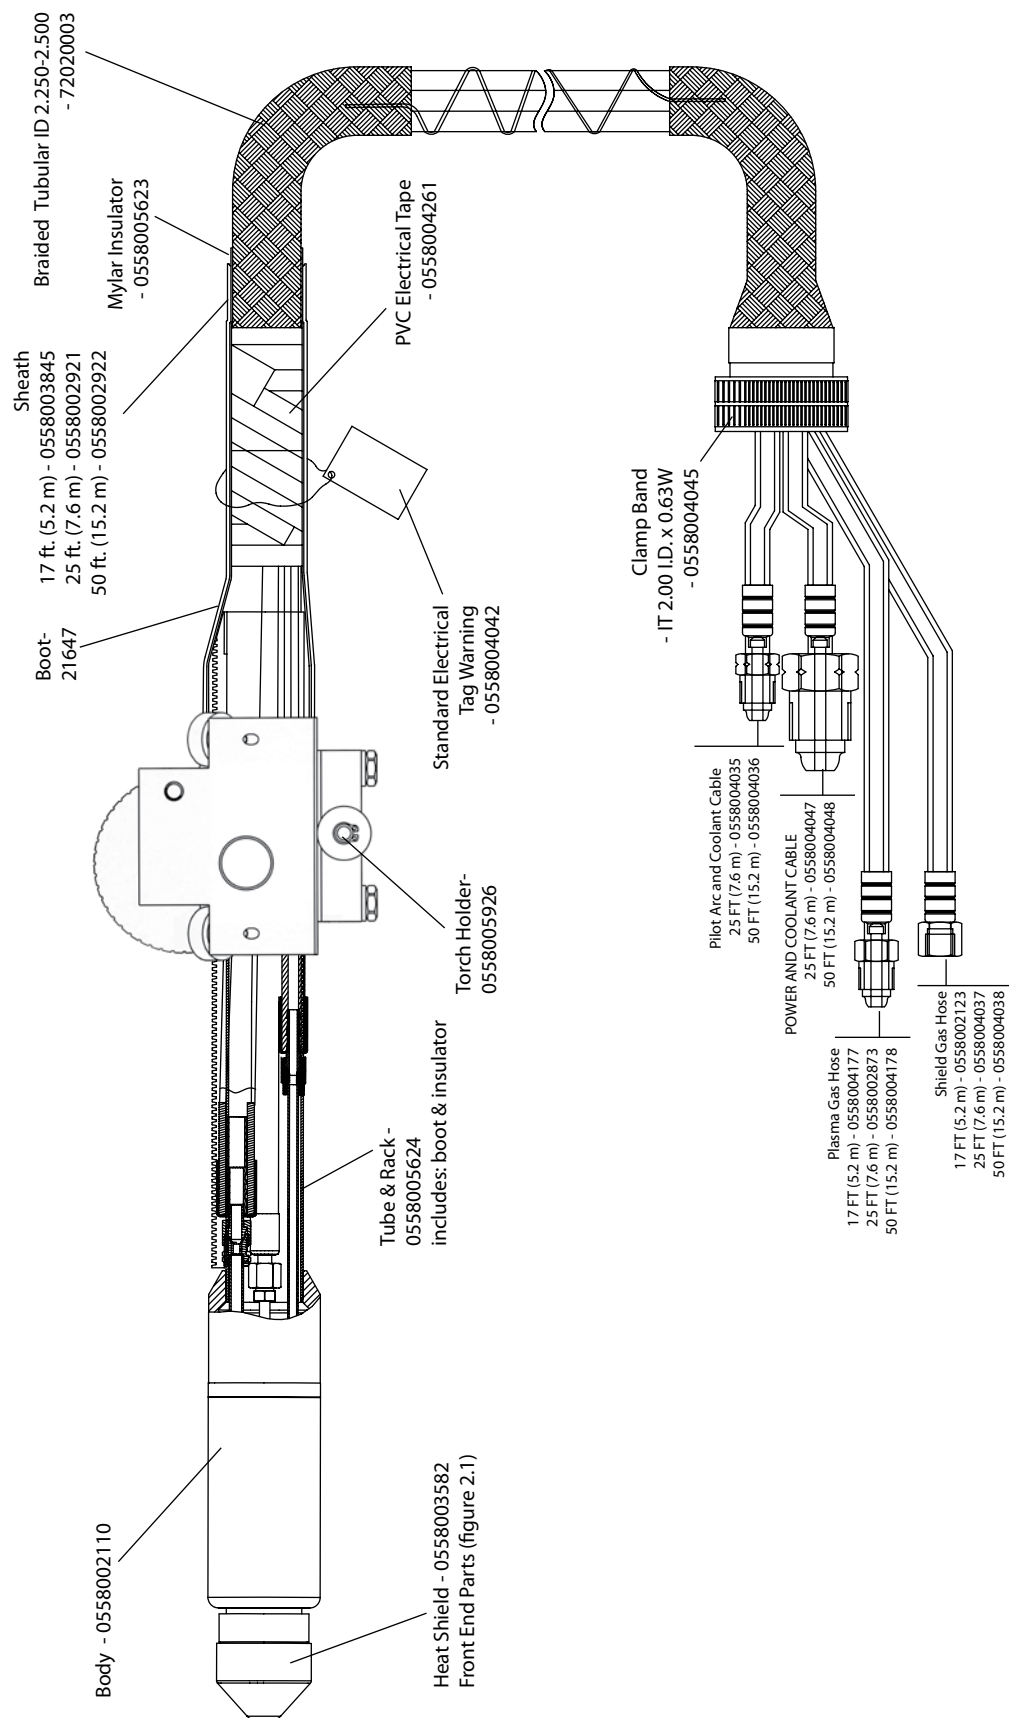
Replacement Parts - PT-26 "SL" In-line Torch Assembly
